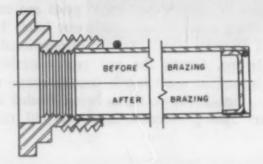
The copper rings are preplaced in assembly and then when the complete assembly is in the electric furnace, the copper penetrates through the joints as shown.
